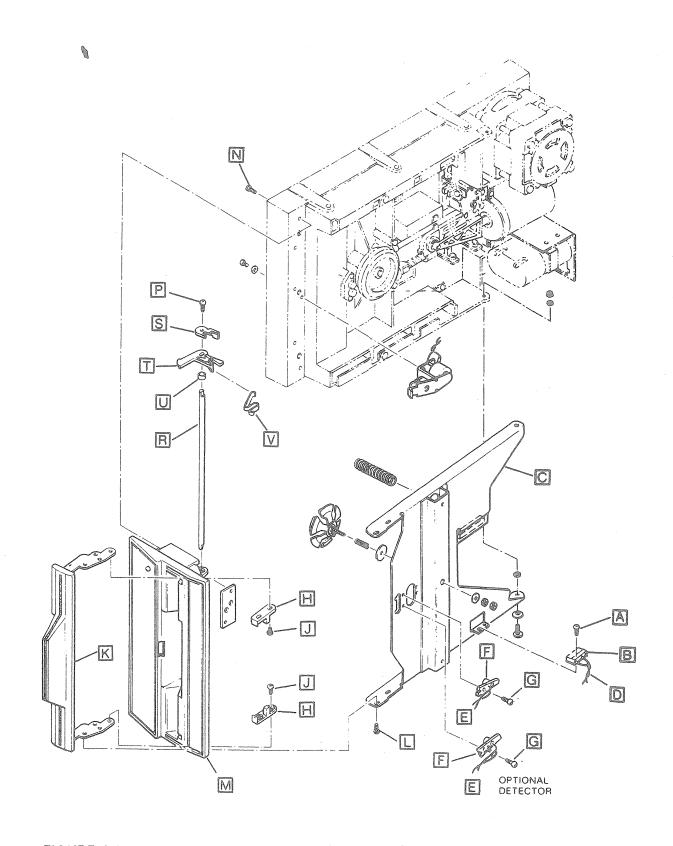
DOOR CLOSED SWITCH, INDEX SECTOR DETECTOR, DOOR, BEZEL AND INTERLOCKING LATCH ASSEMBLIES REMOVAL AND REPLACEMENT
